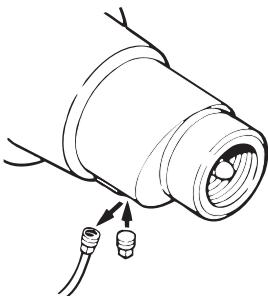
Plug AVC Port when installing pre-charged tank on existing pumps. New pumps come with plug installed.
